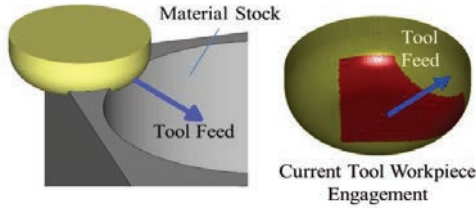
Example tool/workpiece engagement determined through simulation of material removal from stock material.
